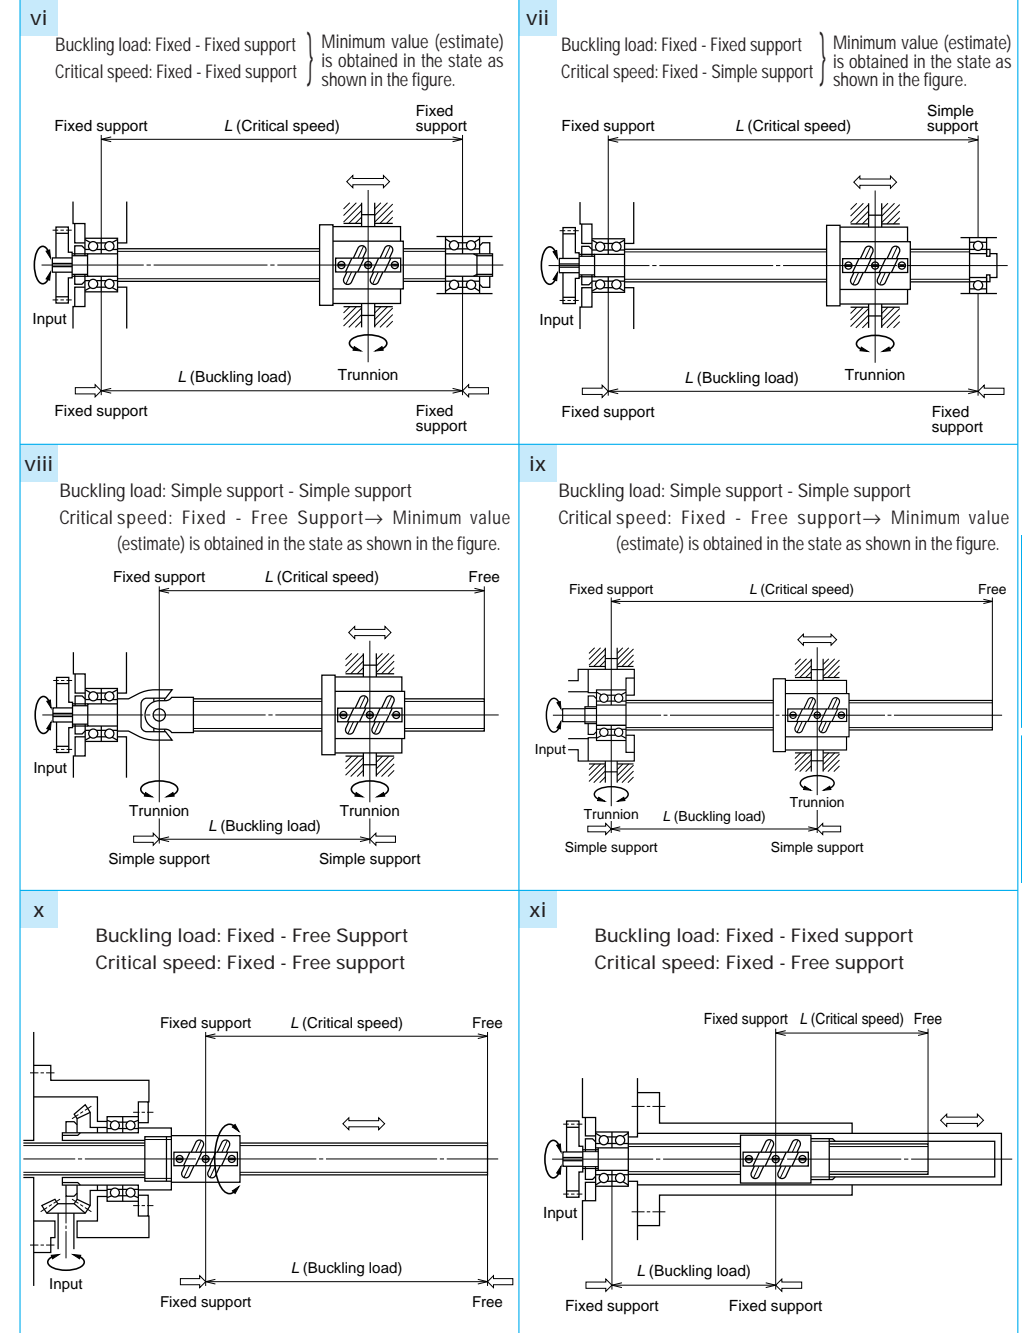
Supporting conditions of screw shaft and ball nut w
